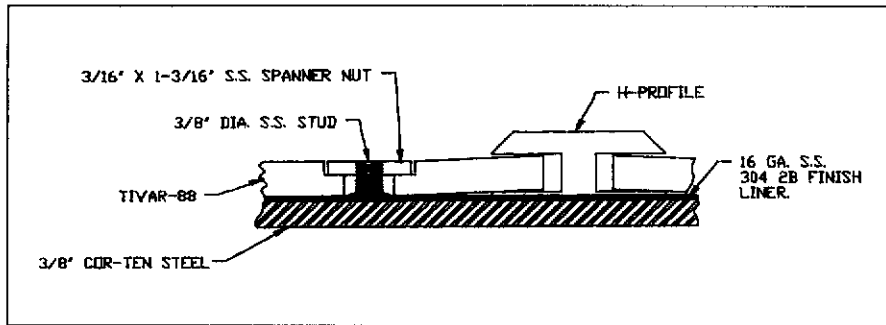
Cross-section of the weld stud, spanner nut and H-profile
